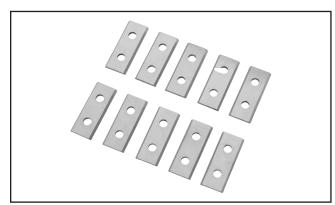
T34008 Replacement Indexable Carbide Inserts.
